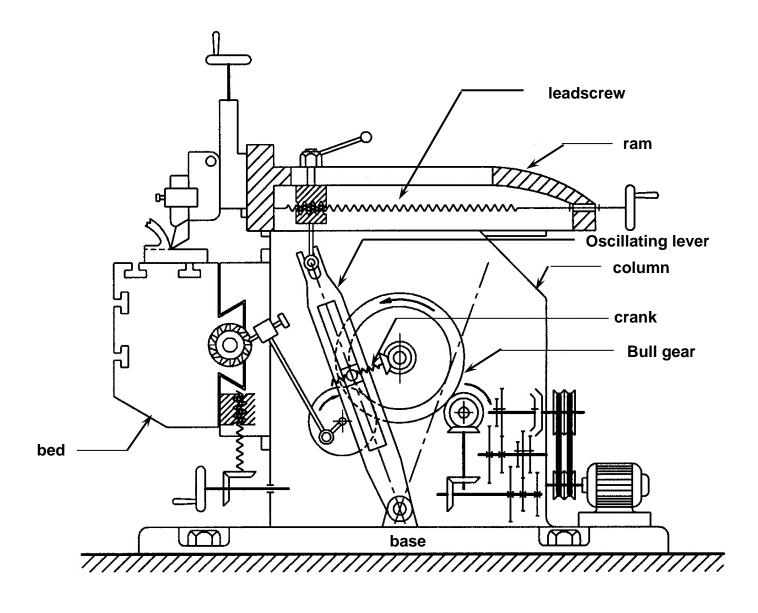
Kinematic diagram of a shaping machine.
